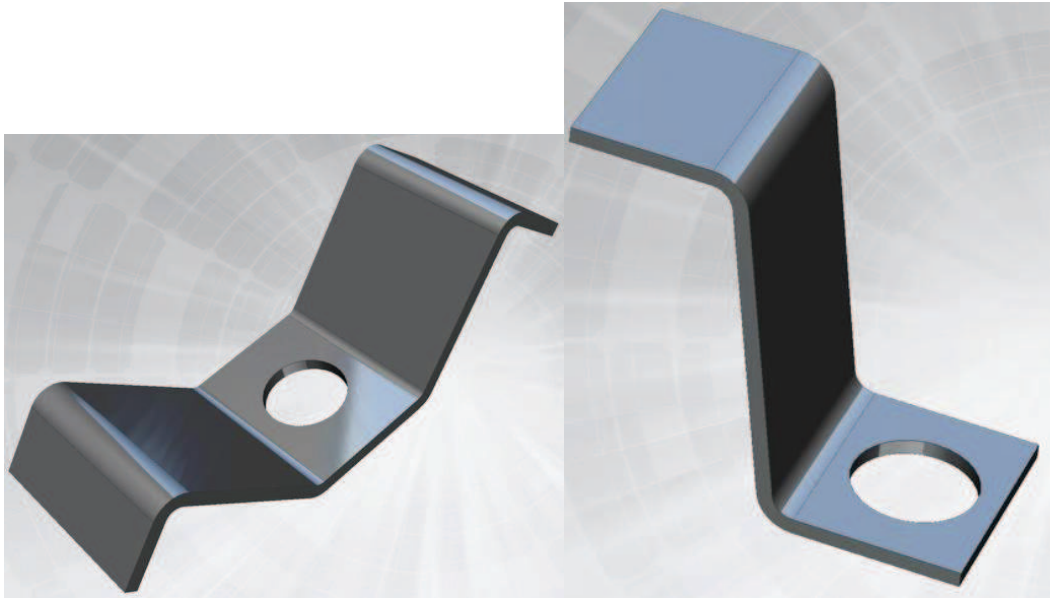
The TZM Molybdenum springs used to keep in contact the side flanges
